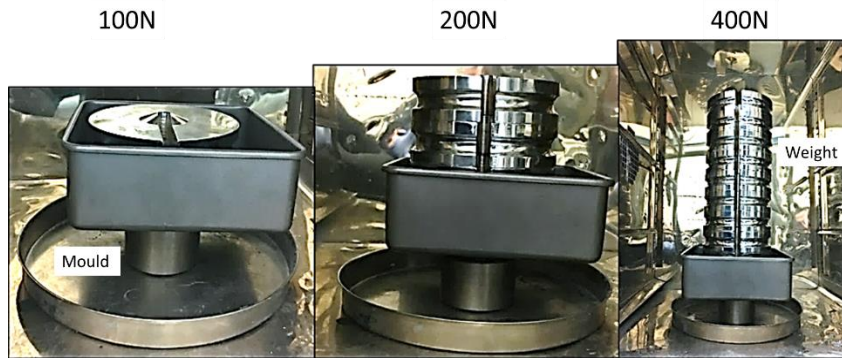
Stainless-steel cylindrical mould with Al₂O₃-PC composite specimen and weights on the top used to fabricate ceramic/polymer interpenetrating phase composite materials.
